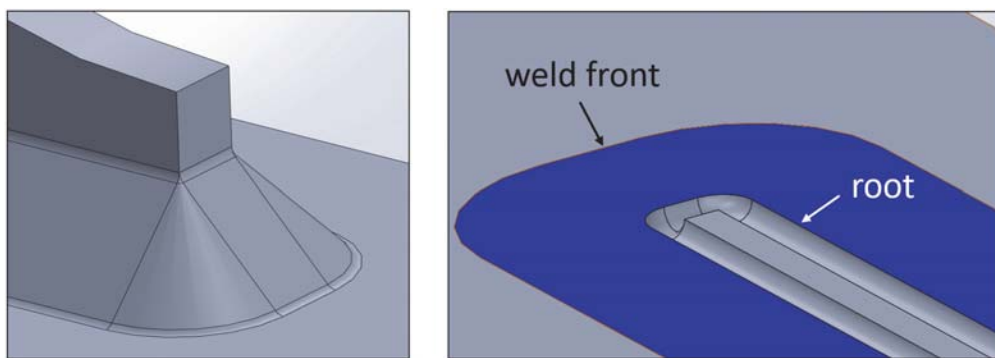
Reference radii in the weld toe and root of the transverse section of the weld.
